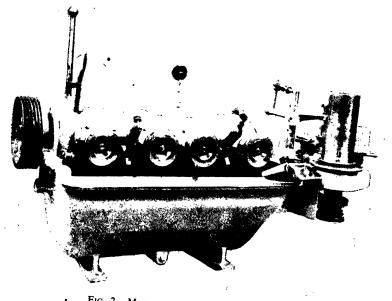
Machine for drawing fine wires The drawing capstans are arranged in the form of stepped cones.
